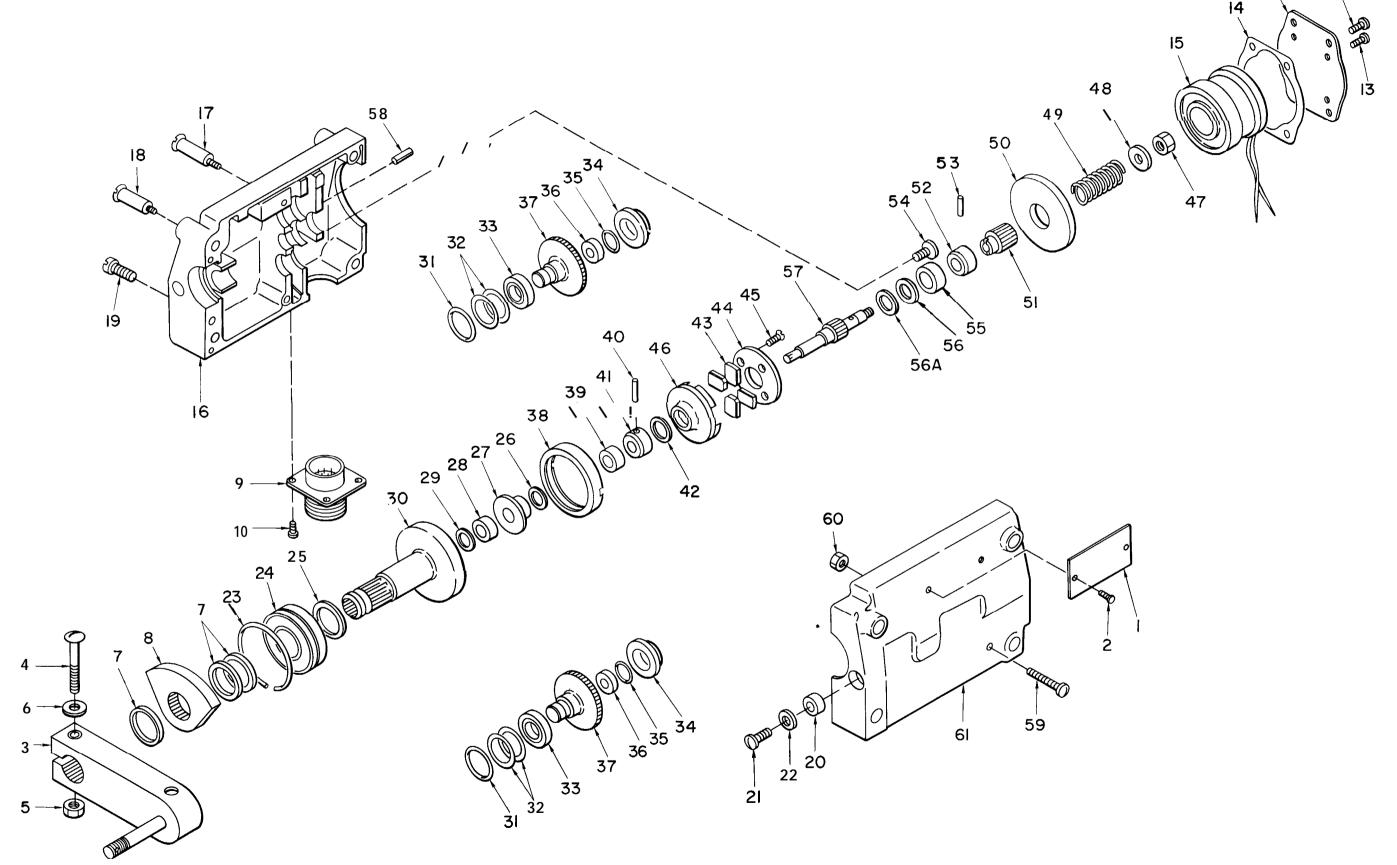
Magnetic Brake Assembly, Exploded View, Part No. R460M10, R460M15 and R460M15-3.
